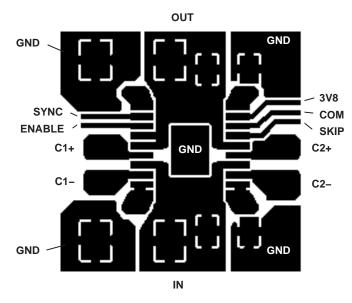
Recommended PCB Layout for TPS60100 (top view)
